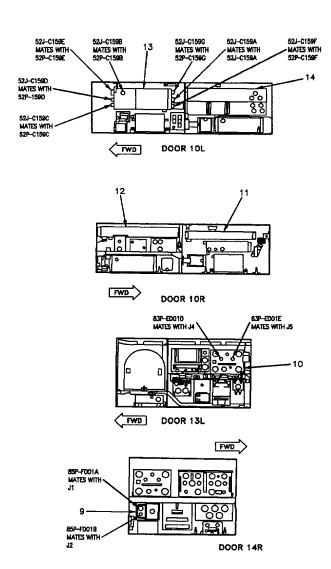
Electrical Boresight Compensation System Locator (Sheet 4)
